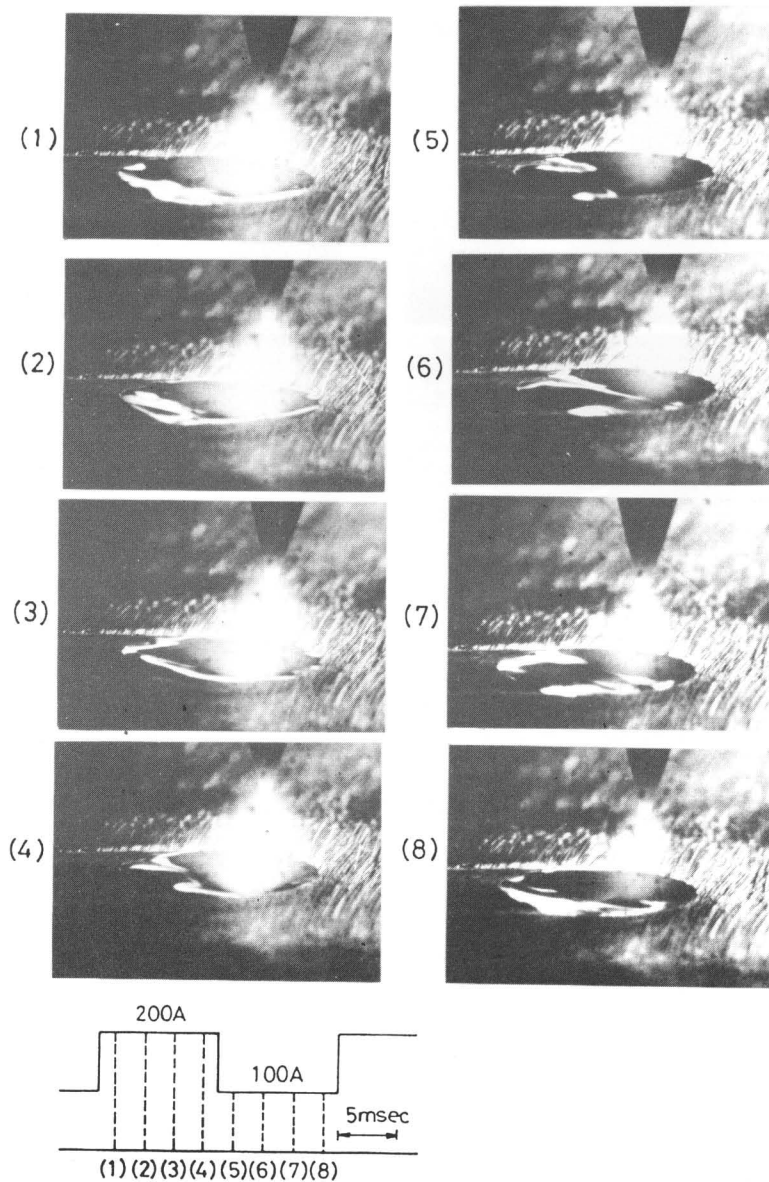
Typical frames picked up from high speed photography (410frames/sec) of weld pool behaviour in pulsed TIG welding. $I_{av}=150A$, $I_a=50A$, rectangular wave, $f=50Hz$, welding speed =10cm/min, arc length=3mm, vertex angle=30°, mild steel plate(SS41) 9mmt.
